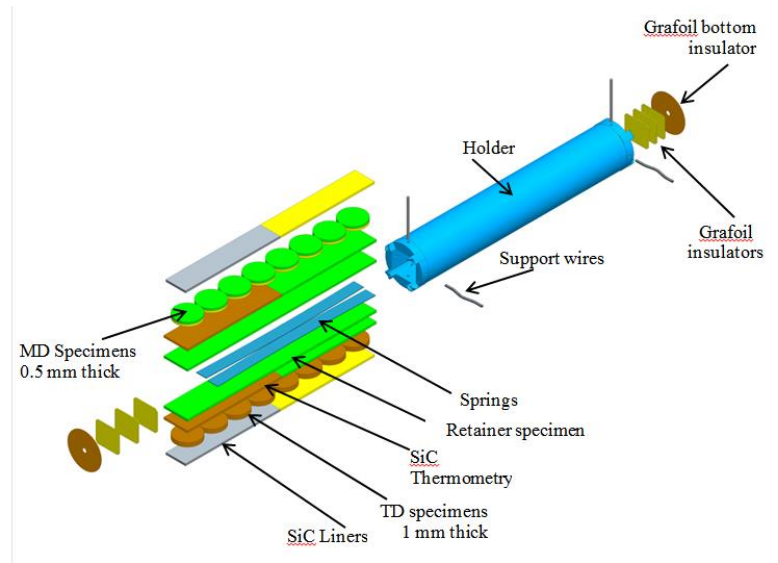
Exploded PRO/E View of the PXW Rabbit Tungsten Rabbit Inner Assembly
